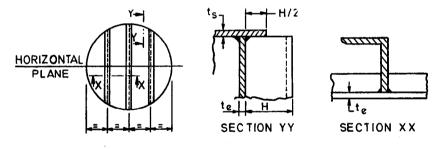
TYPICAL WELD JOINT DETAILS --- ( continued )
